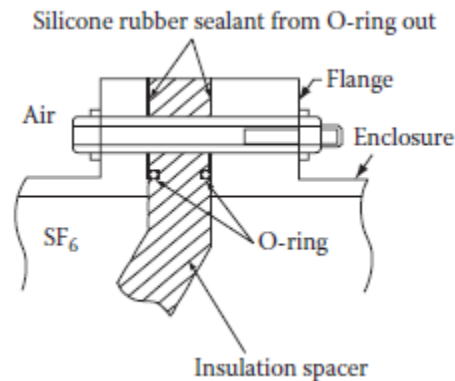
Gas seal for GIS enclosure. O-ring is primary seal; silicone rubber sealant is backup seal and protects O-ring and flange surfaces.
